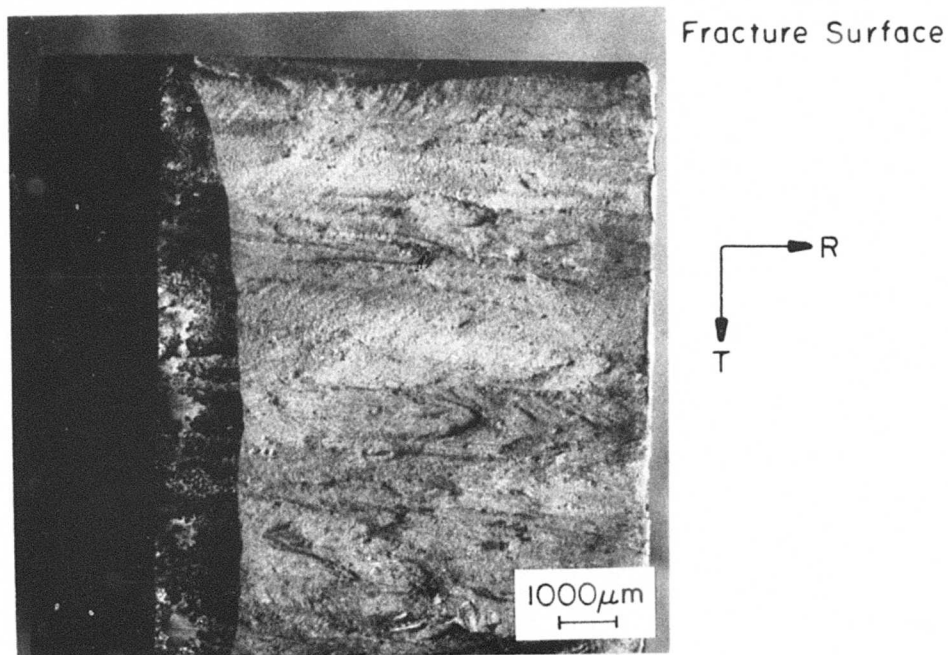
Alloy 227, sample 7WRL2. Fracture surface X8, crack path X500.
